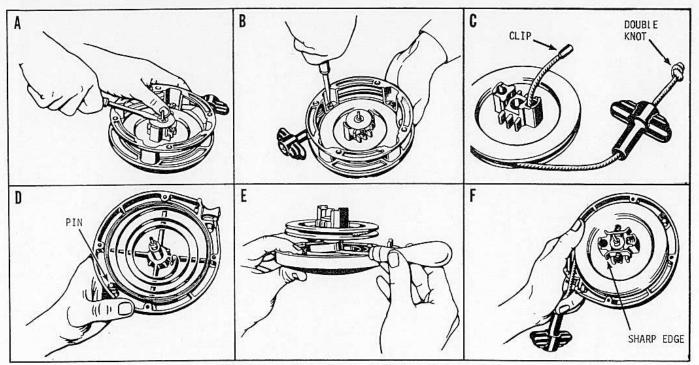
RECONDITIONING, FAIRBANKS-MORSE STARTER
